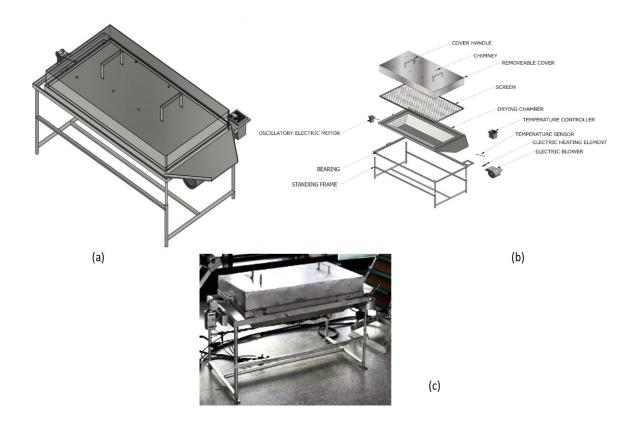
Developed dehydrator (a) Isometric view (b) Exploded view (c) Pictorial view
